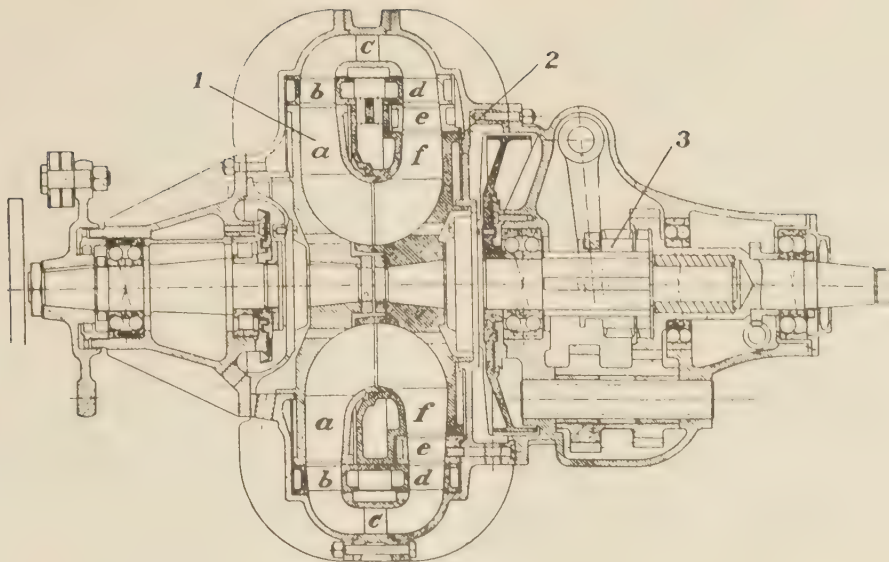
LYSHOLM-SMITH CONVERTER WITH REVERSE GEAR
